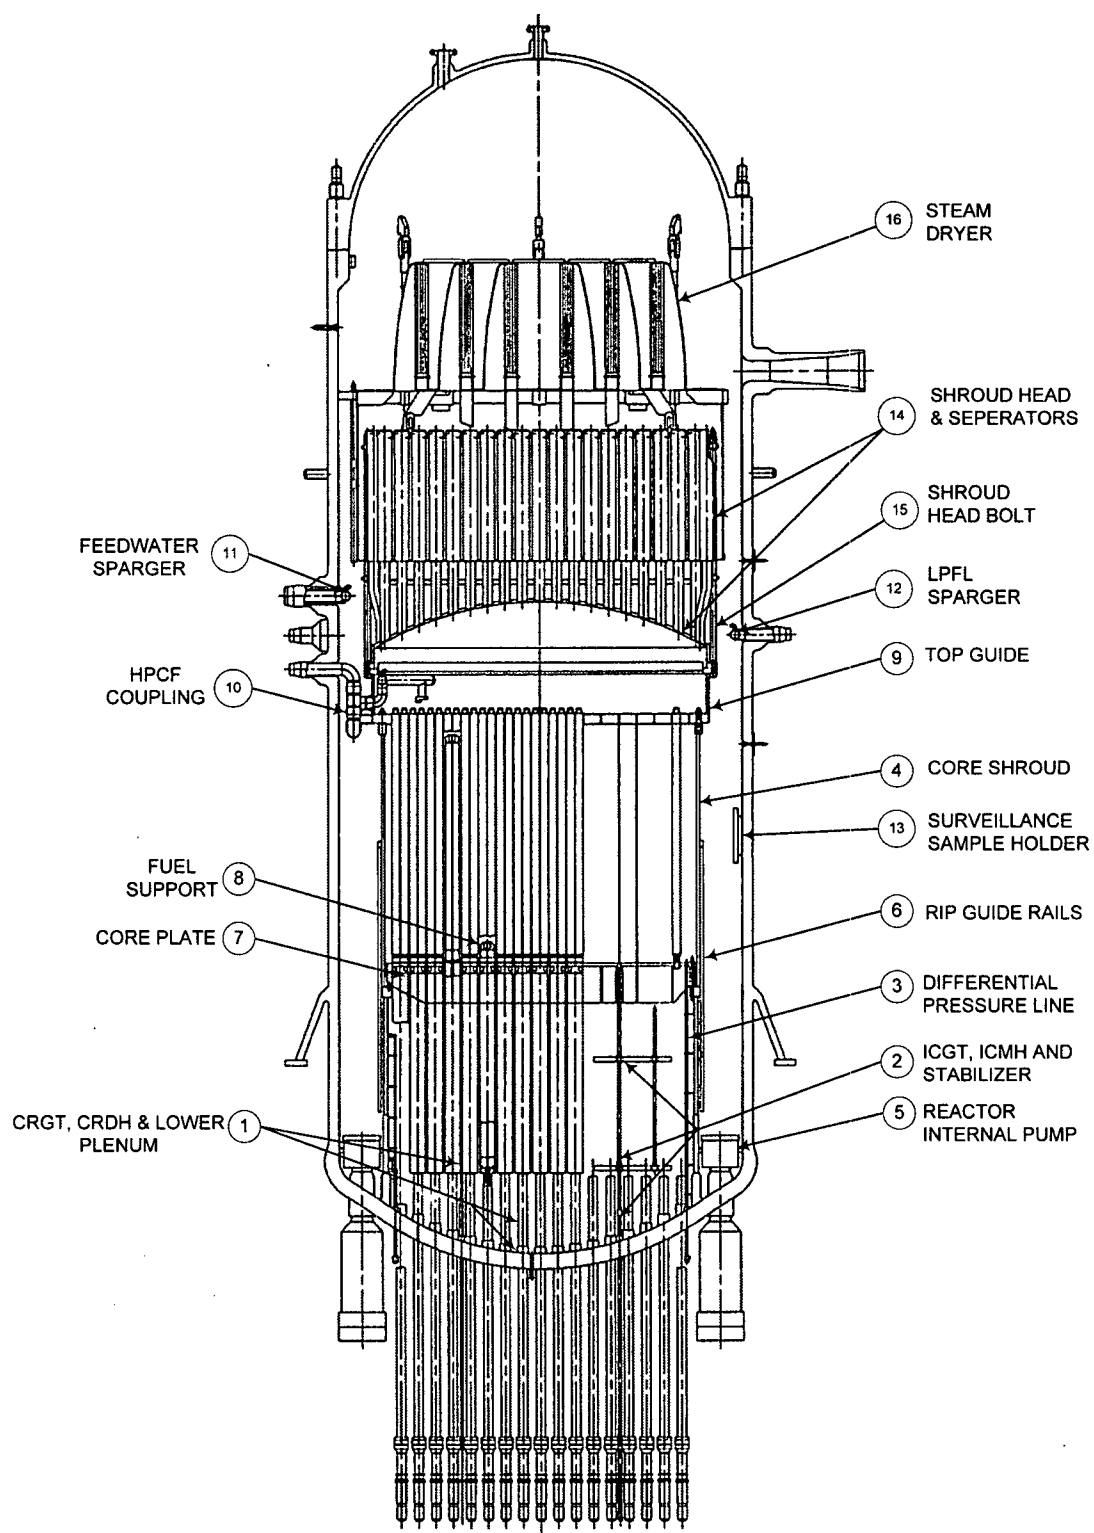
Planned Locations of Reactor Internal Components for Inspection
